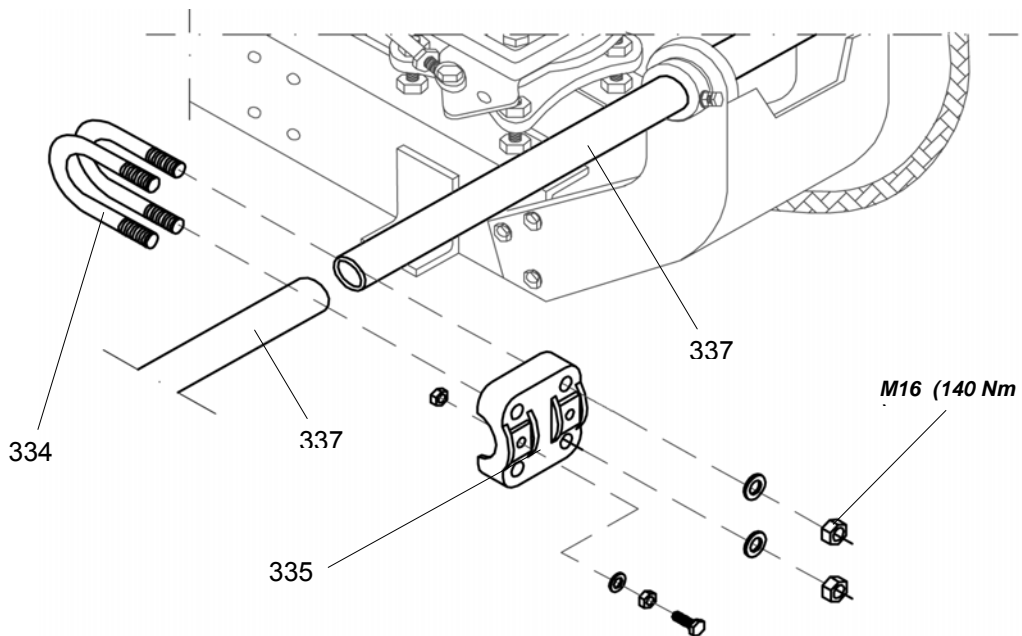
Mounting of coupling piece (342, 334) for connection of earthing-switch shafts (337)
